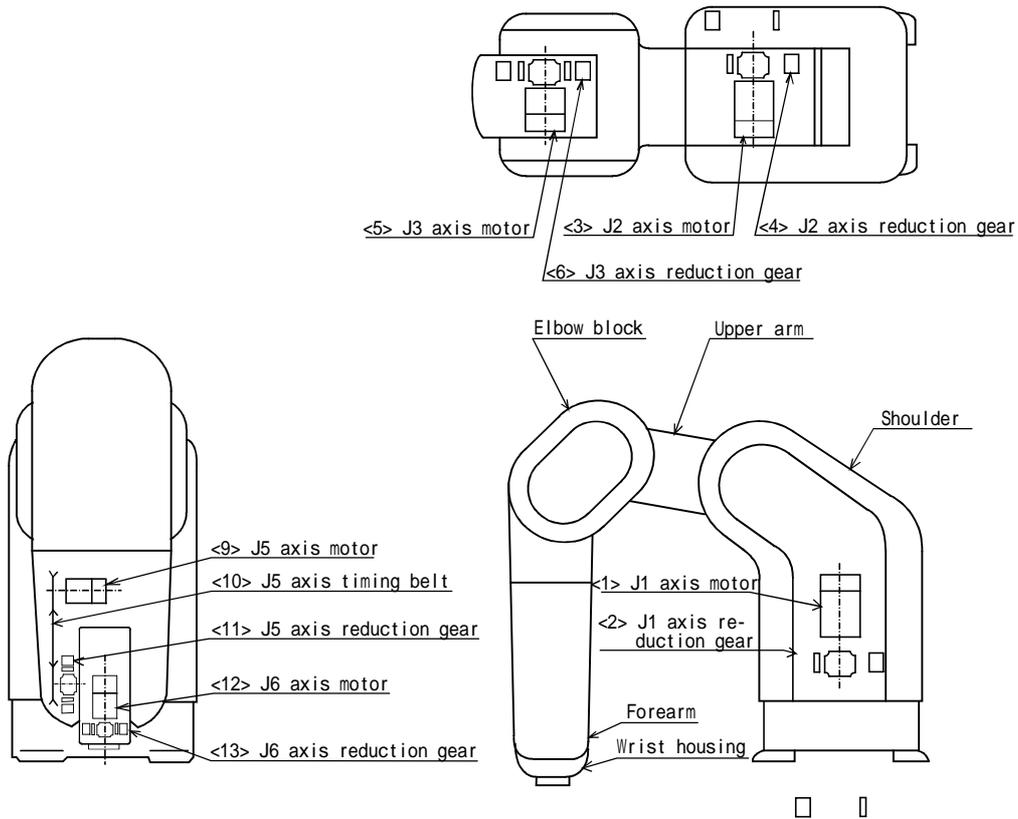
Outline structure drawing of robot arm (5-axis type)
